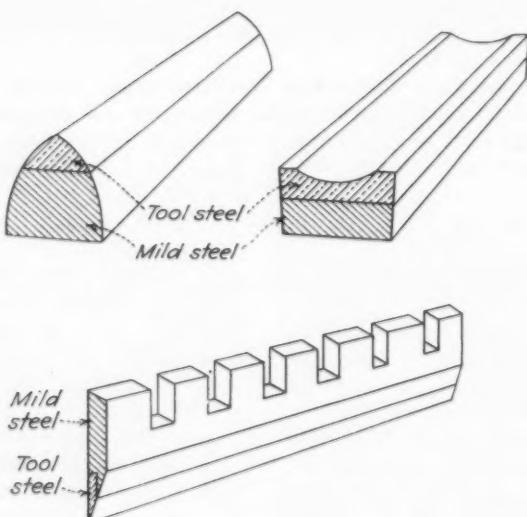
The assembly of tool steel and mild steel is used for engine slides, machine tool faces, etc.
